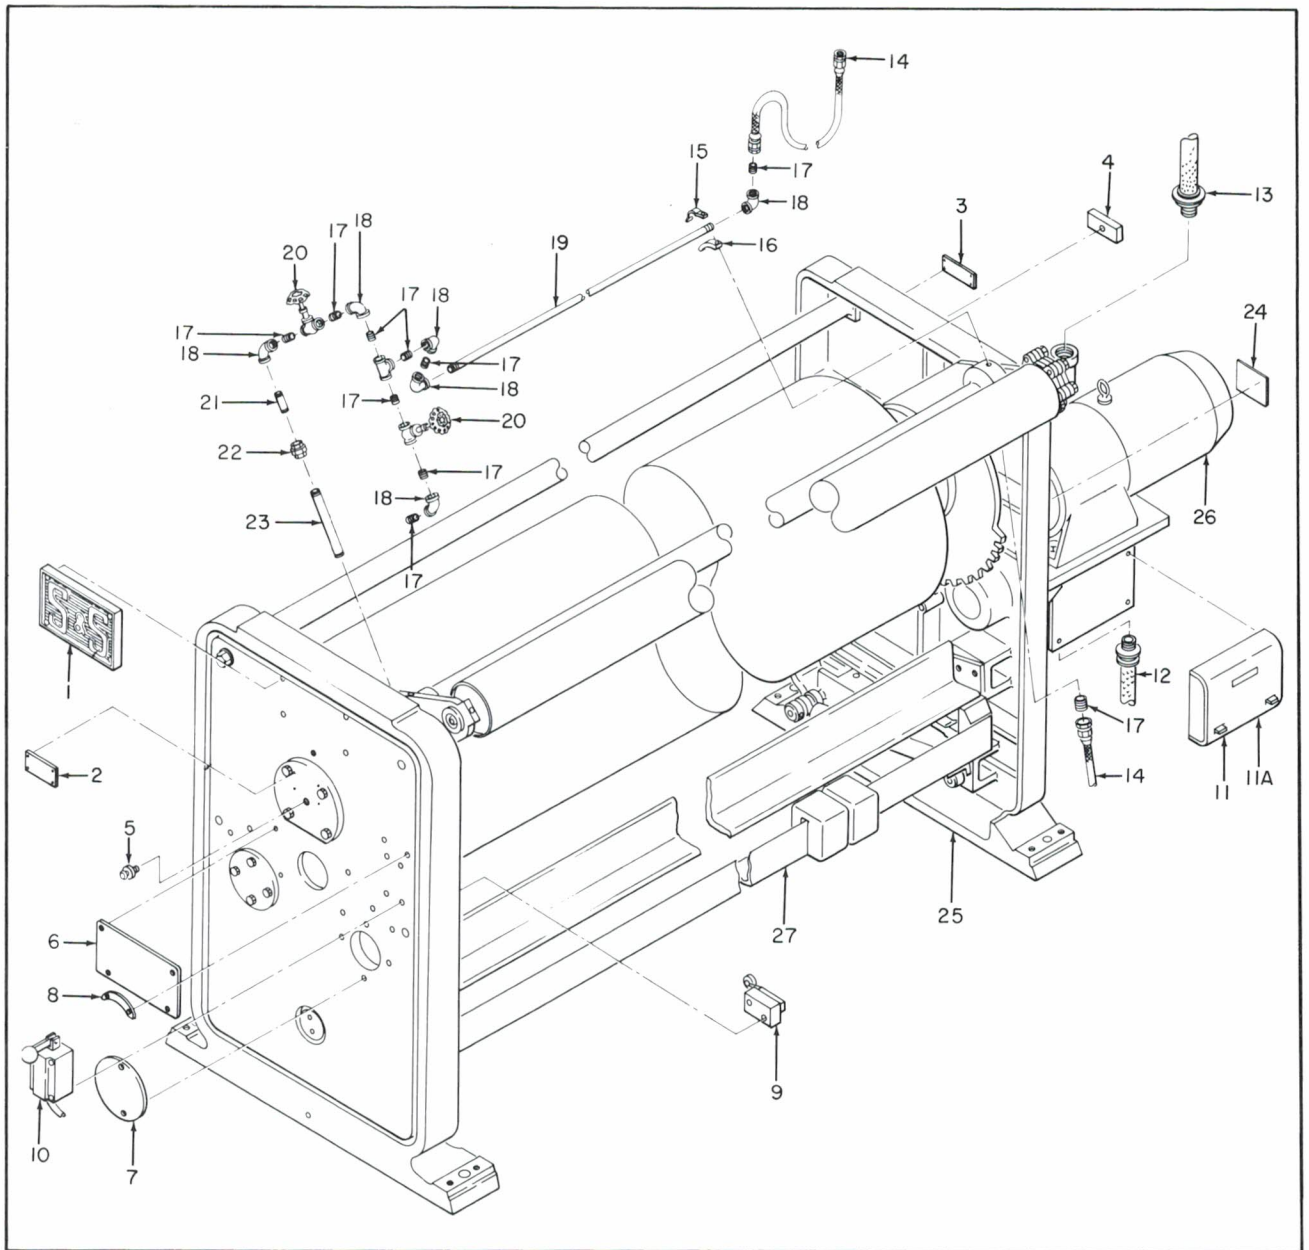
Model HPC Preconditioner Steam, Lubrication and Electrical Parts
